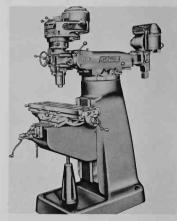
Vertical milling machine. (Bridgeport Machines, Inc.)
